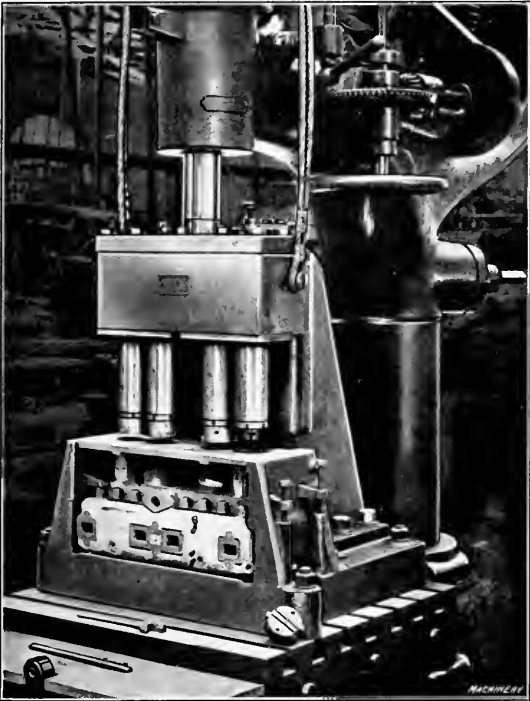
Four-spindle Reaming Attachment and Fixture with Cylinder in Place
